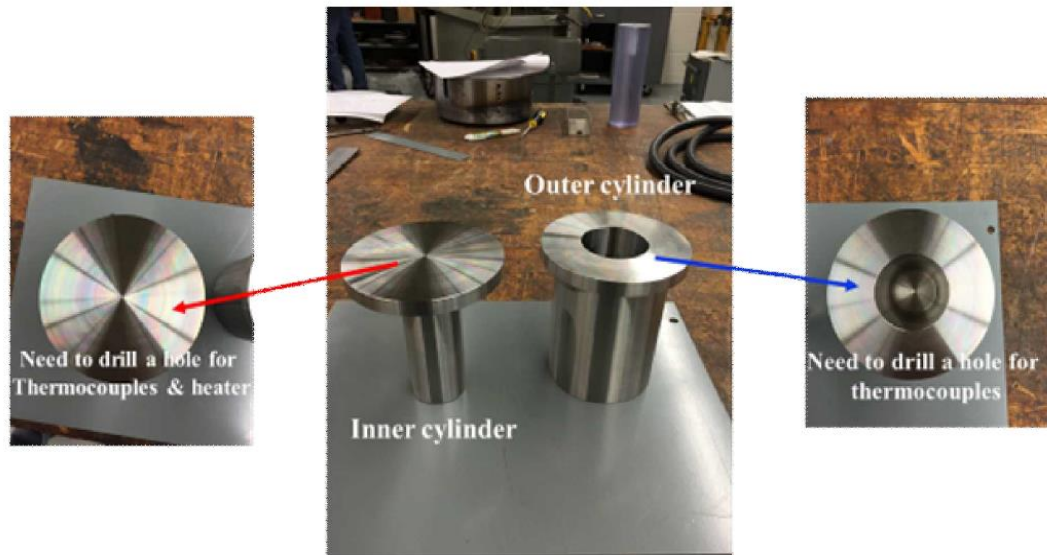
Design and assembly of the concentric cylinder test apparatus for measuring thermal conductivity.
